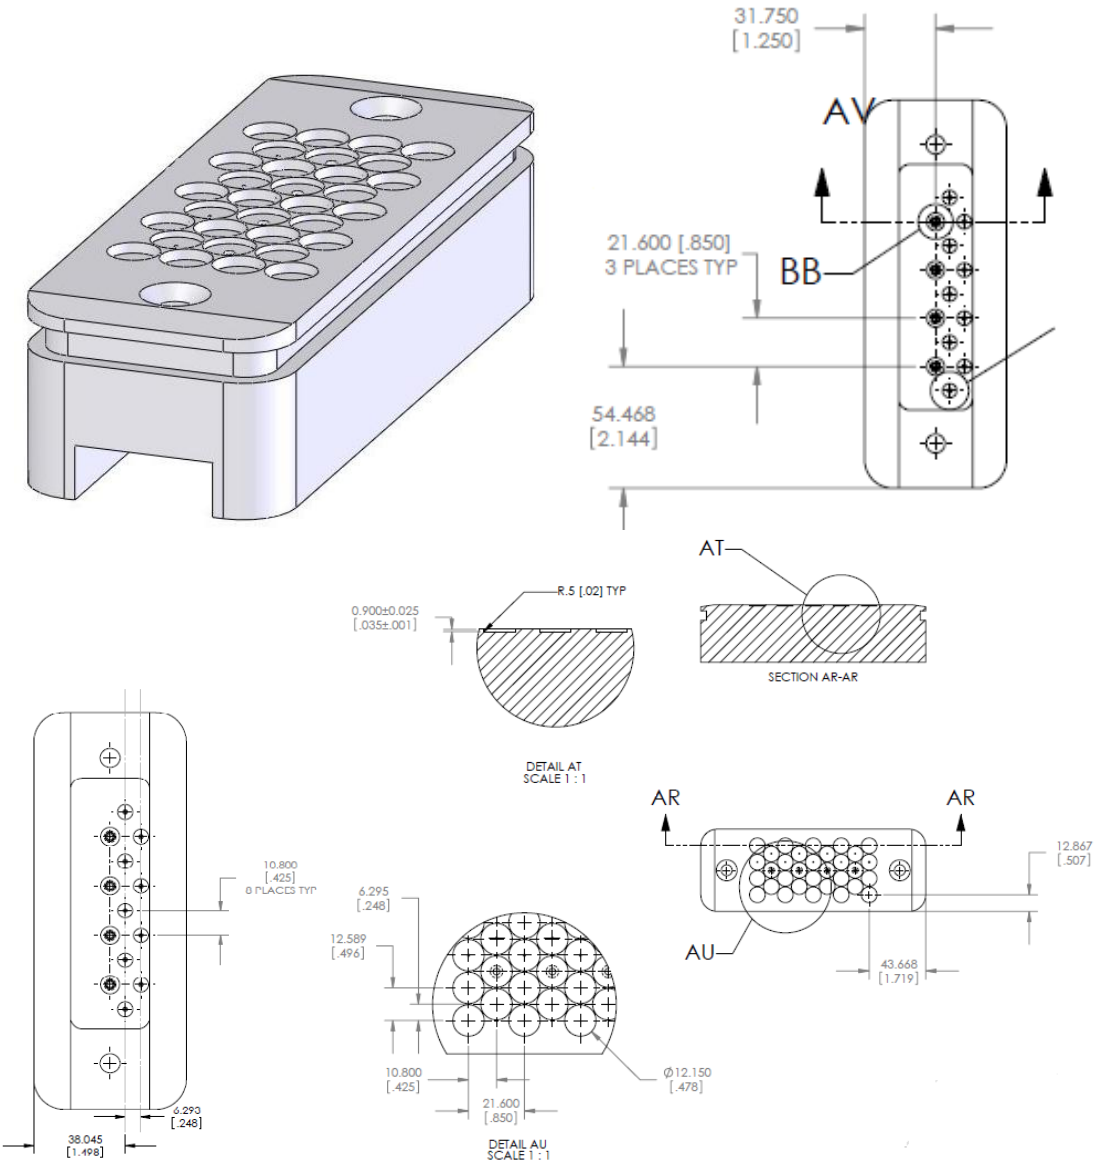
Detailed view of a 12.15 mm diameter HP plate
